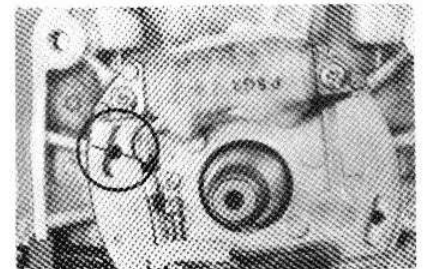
Align stator plate marks with crankcase boss on models with capacitor discharge ignition system.
